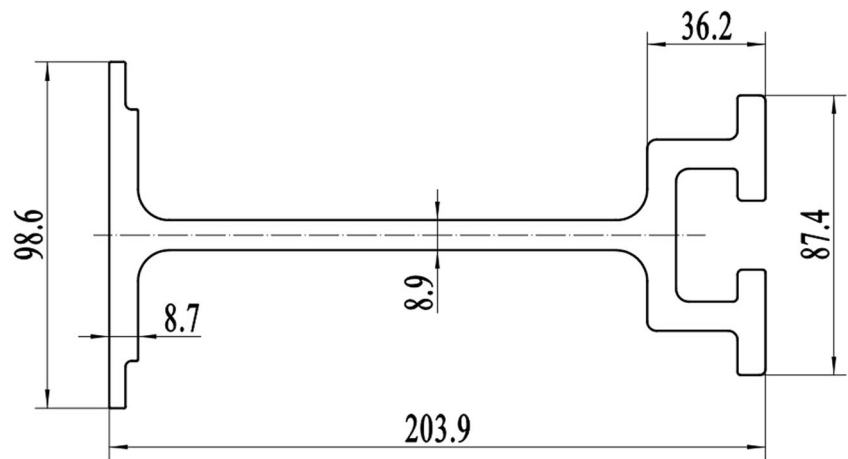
Cross-section shape of the profile in this work (unit: mm)
